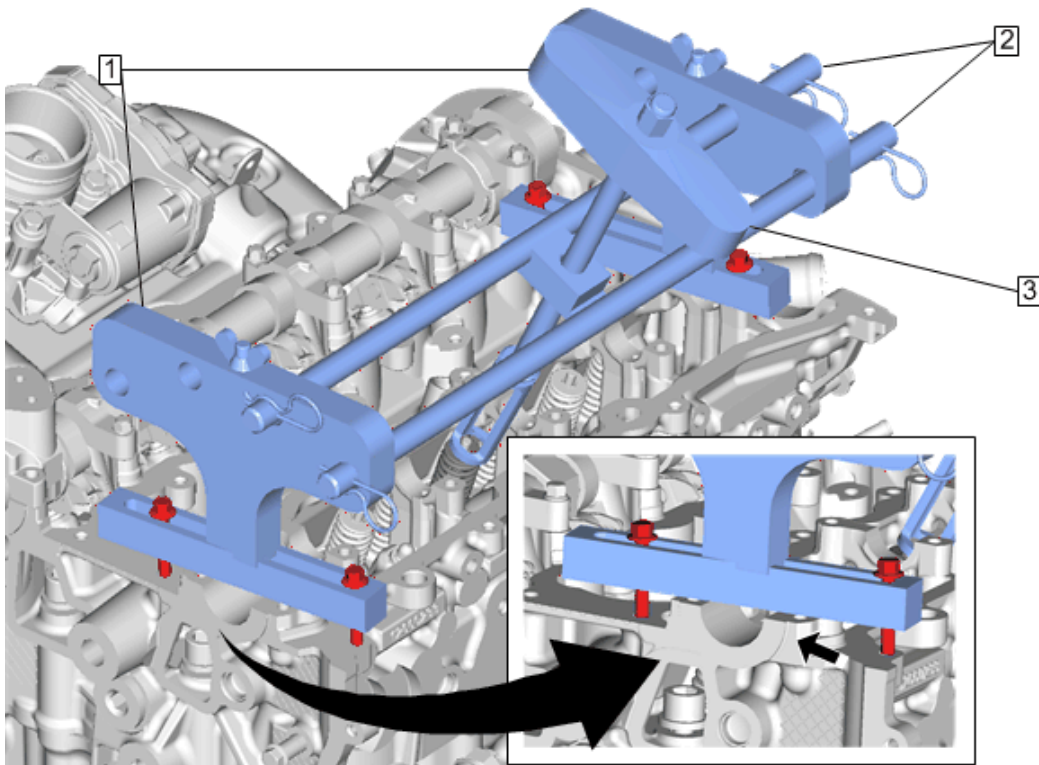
Valve Spring Compressor Kit, Cross Bars And Locks
